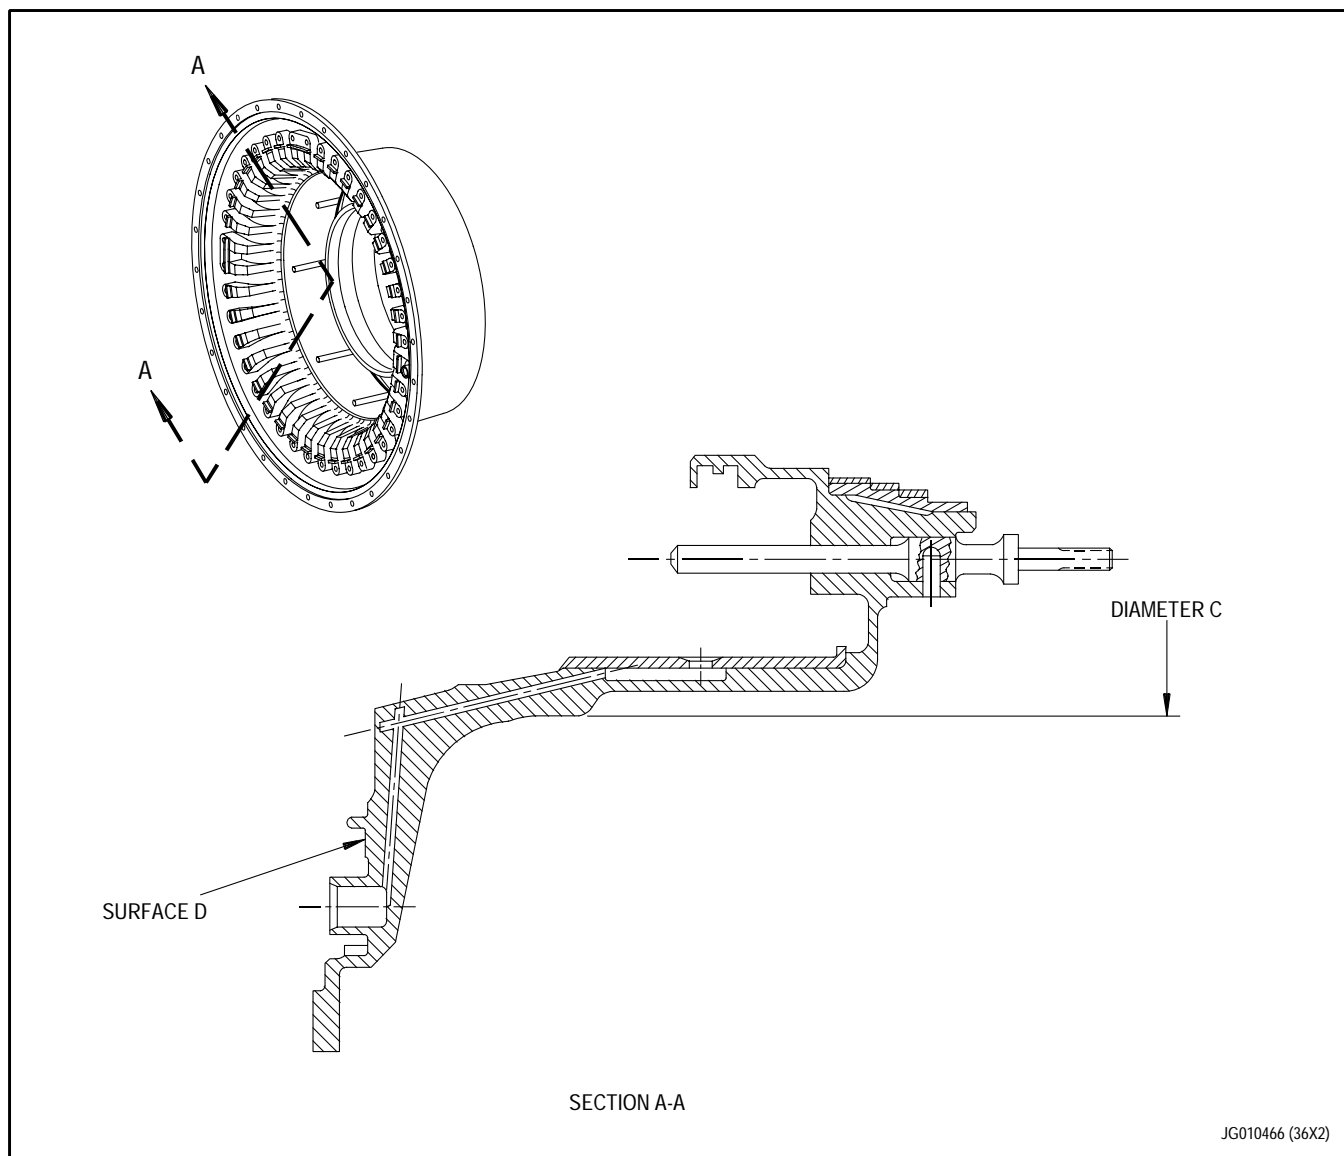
No. 3 Bearing Seal Support Assembly - Blend Repair
